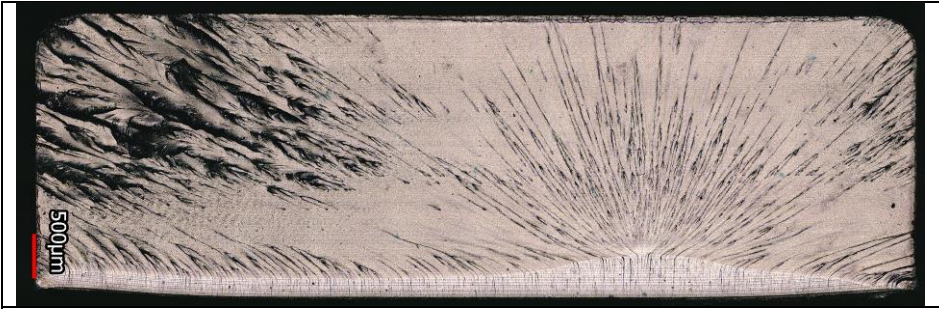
CLSM image of the fracture surfaces of the D1 specimen
